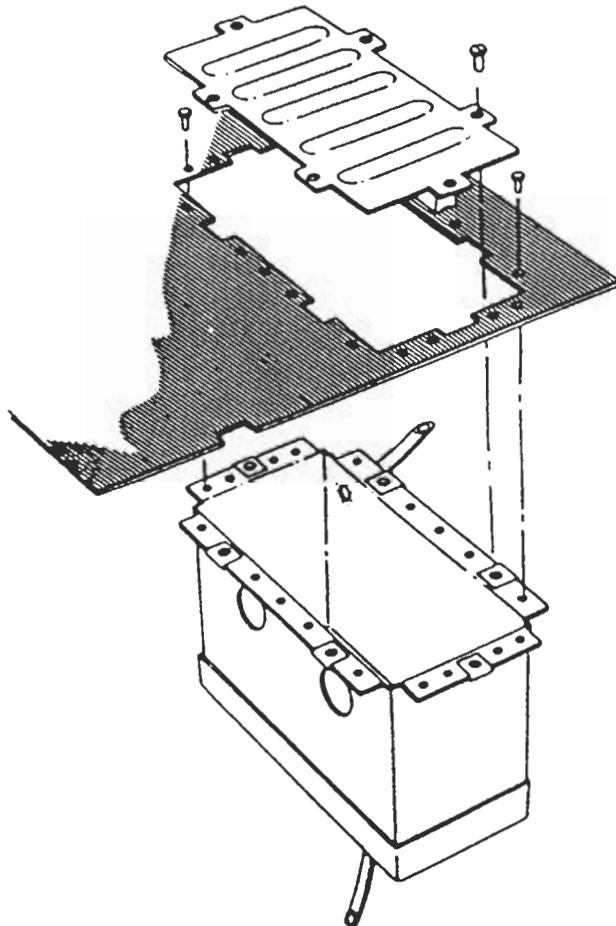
Typical battery box installation suspended from cabin floorboard section.
